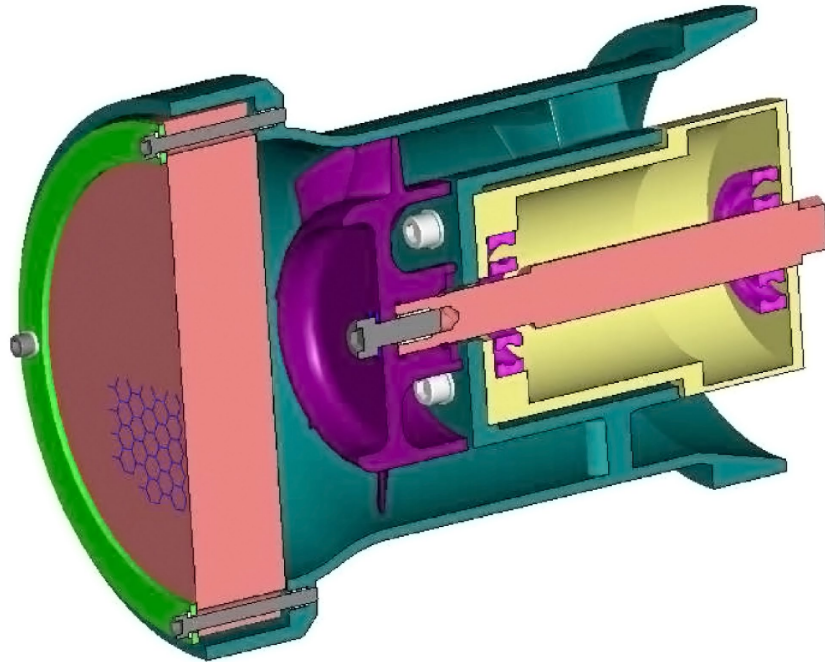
Three-dimensional cutaway view of cabin ventilation fan assembly.
